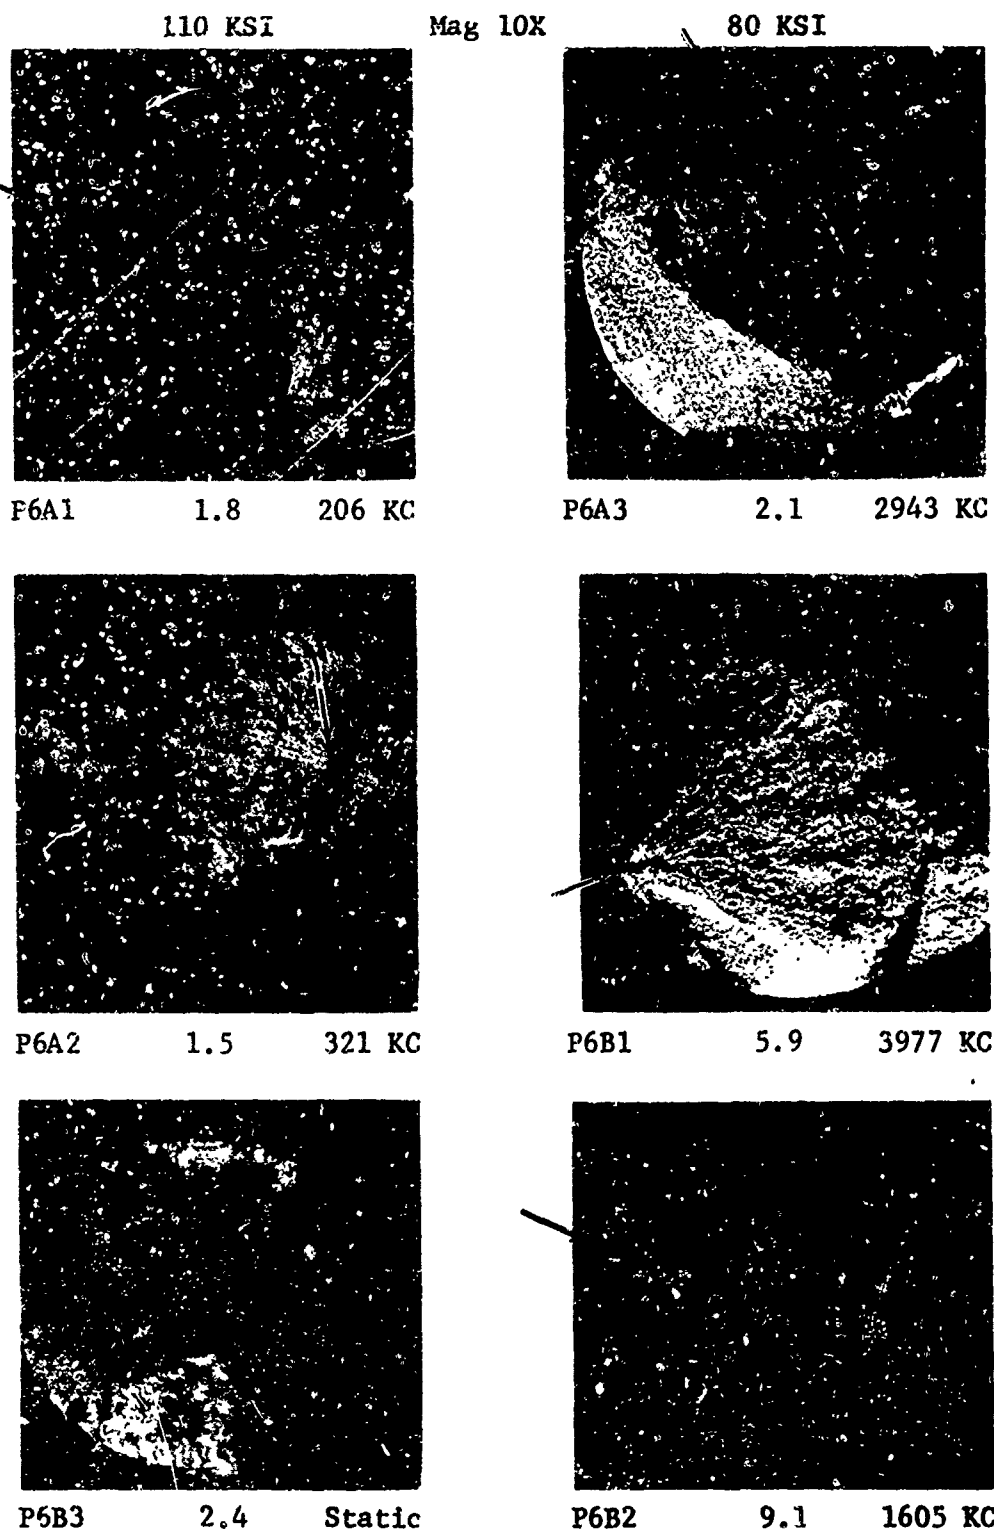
Fracture Surfaces of Failed Fatigue Specimens Series P6-Multiple-Bond/3-Axis Diffusion Bonded with ASTM Grain Size No. 11
